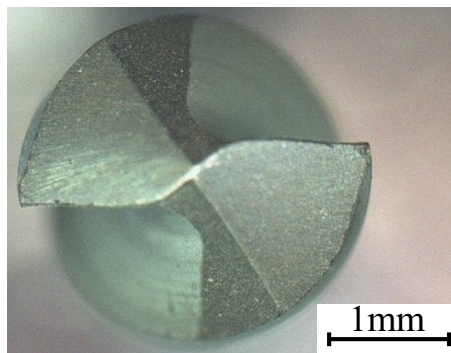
Photograph of cutting edge of TiAlN coated cemented carbide drill
